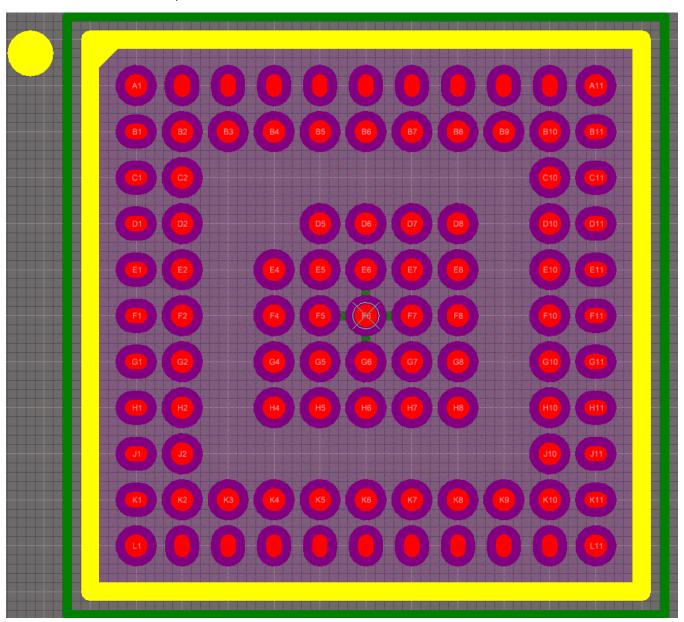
Top View Alternate TPS65986 Footprint (Oval Pads)
